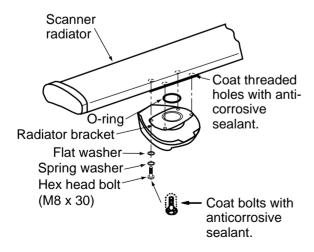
Fastening the radiator bracket to the scanner unit chassis
